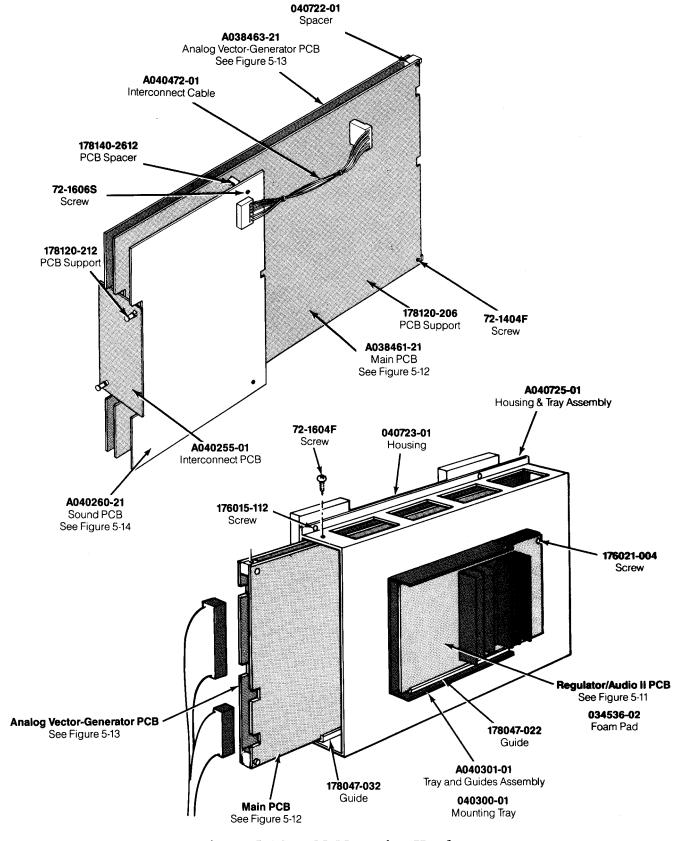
B PCB Mounting Hardware Ireland-Built Cabinet
